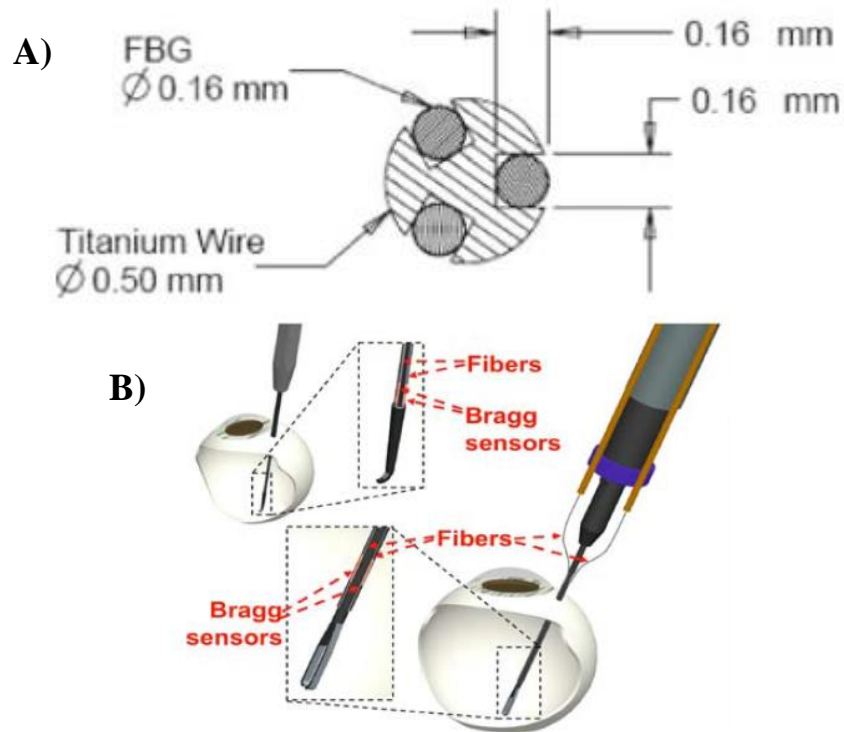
FBG retinal probe (a) cross-section diagram of 2-DOF force-sensing tool; (b) conceptual design of optical fiber force-sensing tool [28].
